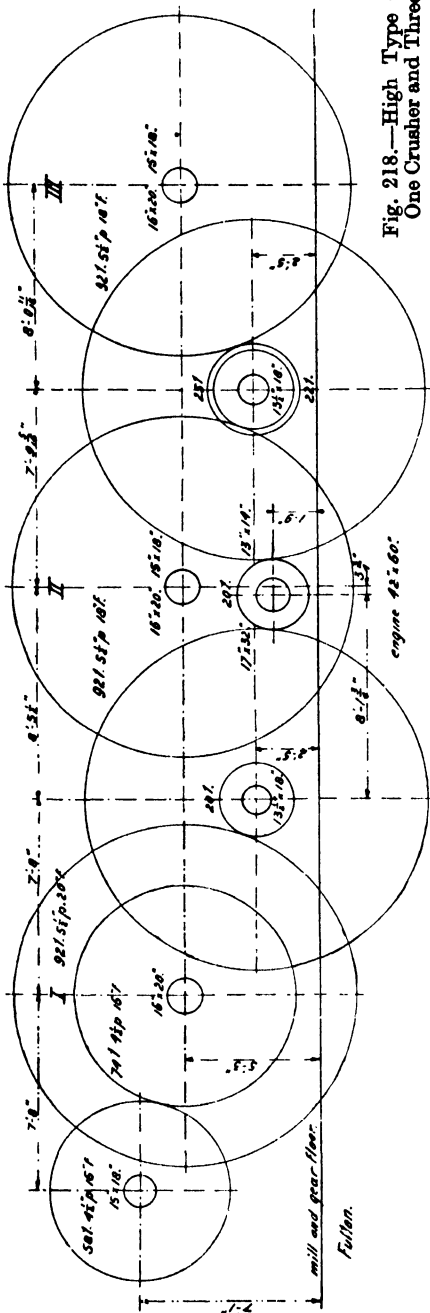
High Type Gear for One Crusher and Three Mills.
